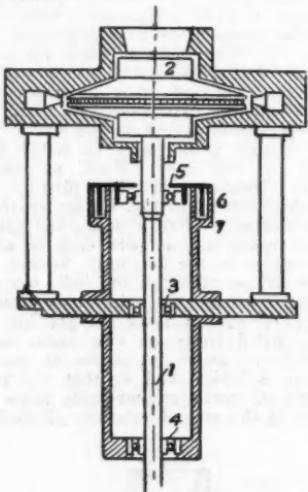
Specially designed stabiliser fitted to rotor shaft of high-speed expansion turbine (KAPITZA)
